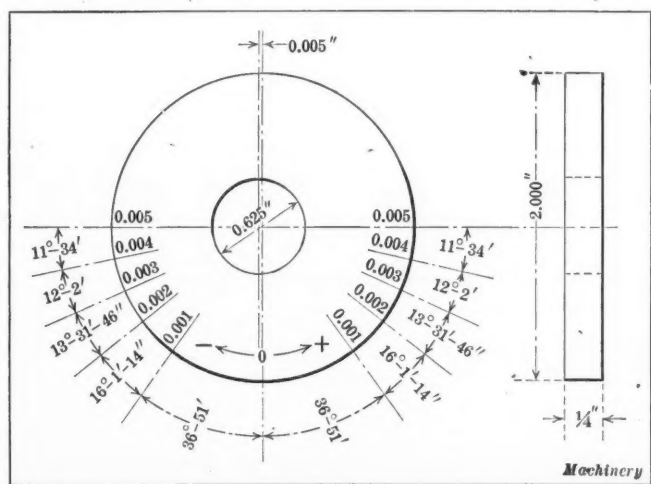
Enlarged View of Graduated Disk B shown in Fig. 7
